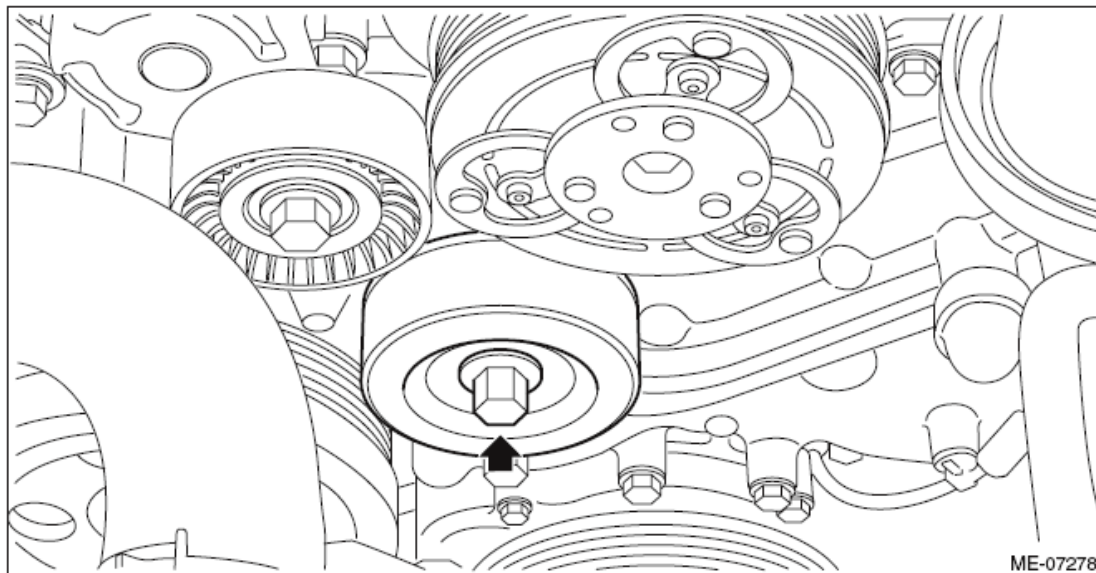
Locating Idler Pulley To Chain Cover Bolt
